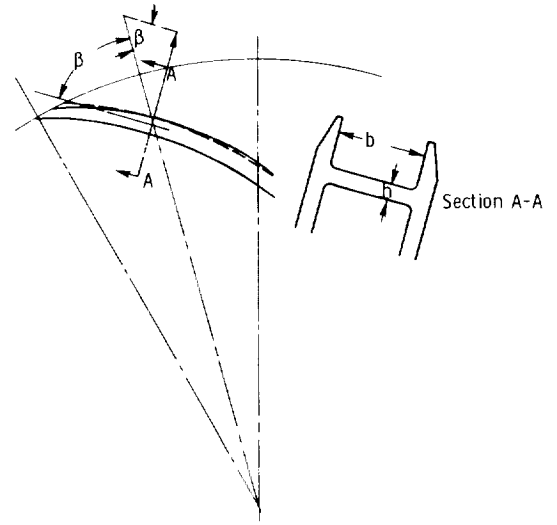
Axially extending nonradial vane supported at both axial ends by shrouds.
